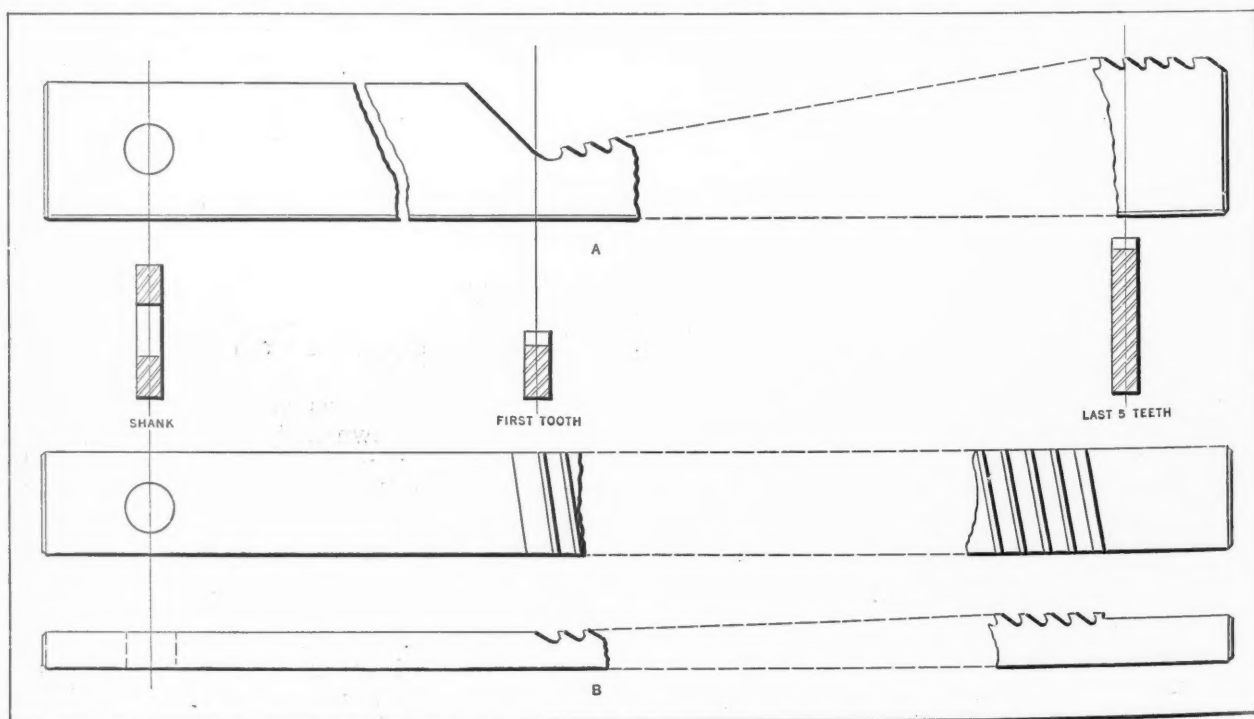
Two Types of Broaches for Finishing Outer Surfaces of Part Shown in Fig. 1
